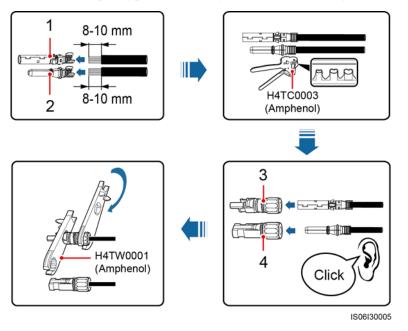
Preparing positive and negative connectors (using metal stamping forming contacts)
